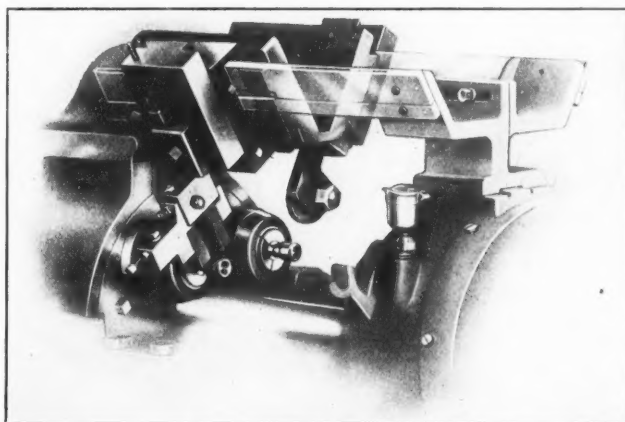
Illustration showing how a Shaving Tool and Thread Roll are applied to the Work
